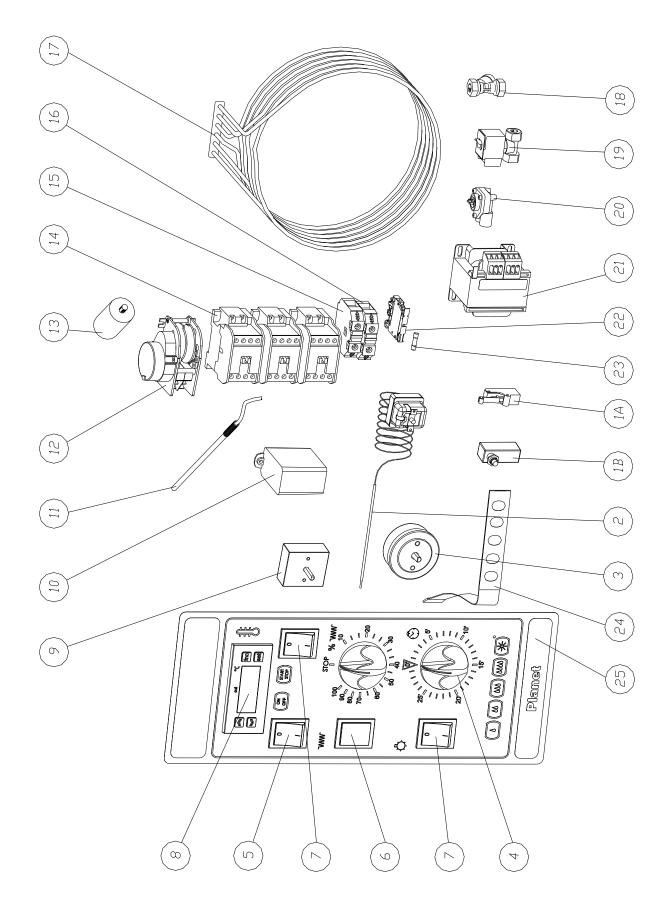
Exploded view of electrical parts (version electromechanical)
